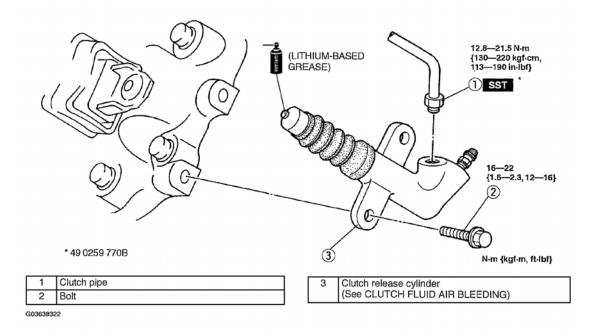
Removing Clutch Release Cylinder Courtesy of MAZDA MOTORS CORP.
